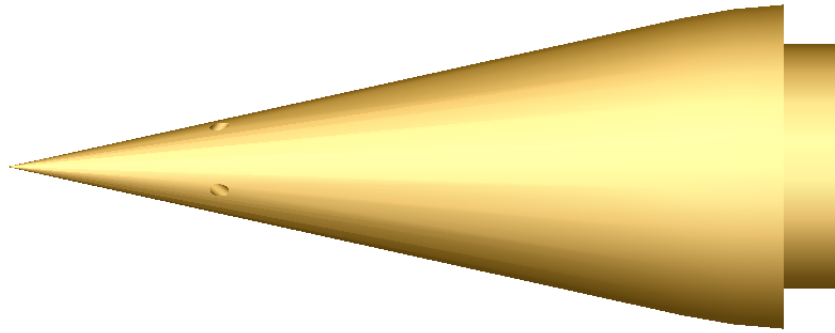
3-D side view of inlet cone with 2 of 4 fuel injection holes shown.
